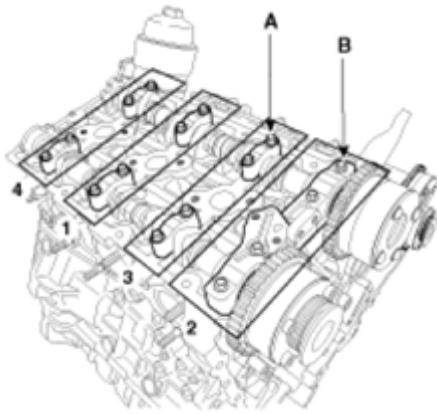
Identifying Camshaft Bearing Cap And Thrust Bearing Cap
